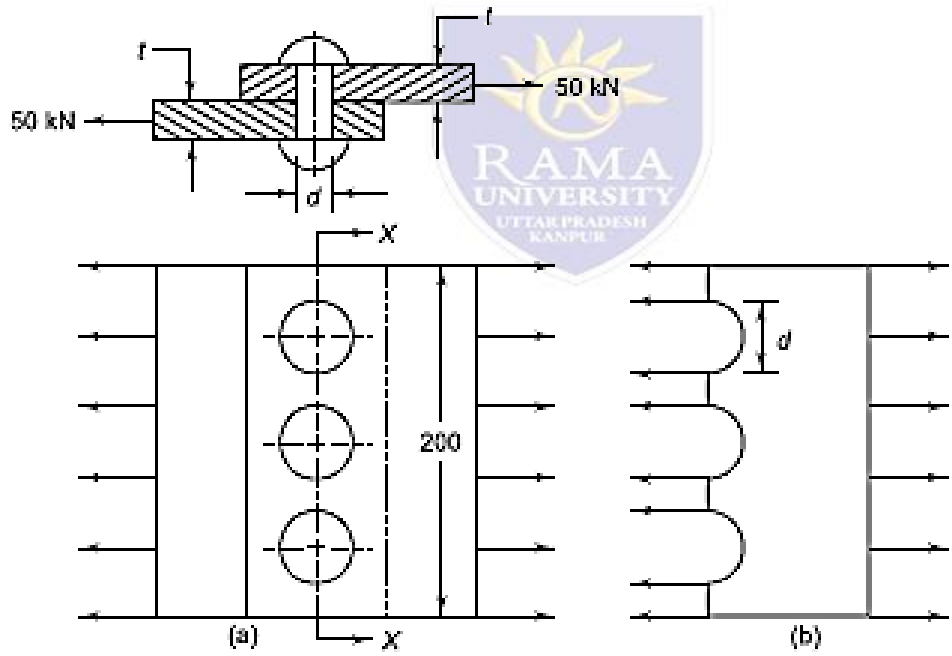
(a) Riveted joint (b) Tensile Stress in Plate
